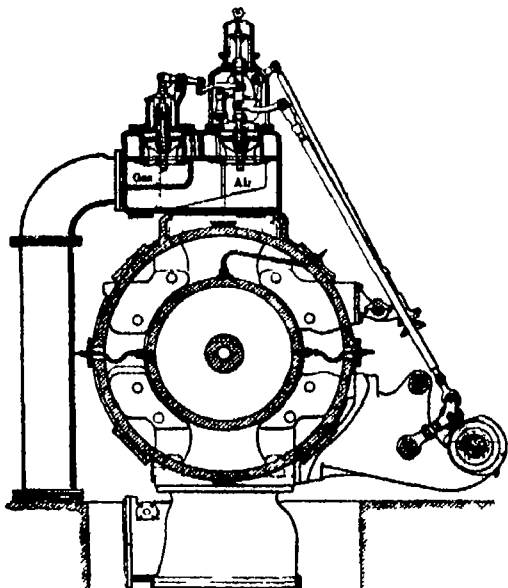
DEUTZ VALVE GEAR FOR LARGE ENGINES
